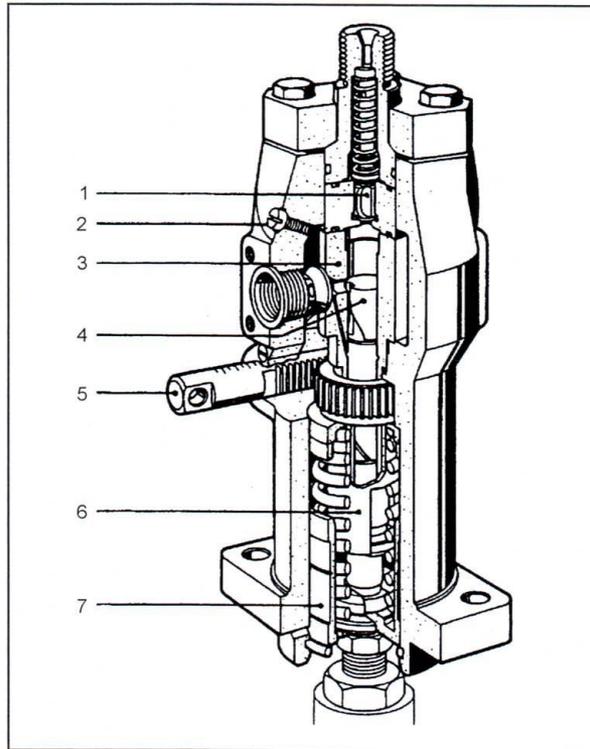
Mechanically controlled single-plunger fuel injection, individual injection pump for large engines⁶: 1, Pressure valve; 2, Vent screw; 3, Pump cylinder; 4, Pump piston; 5, Control rack; 6, Control sleeve; 7, Guide bushing.
